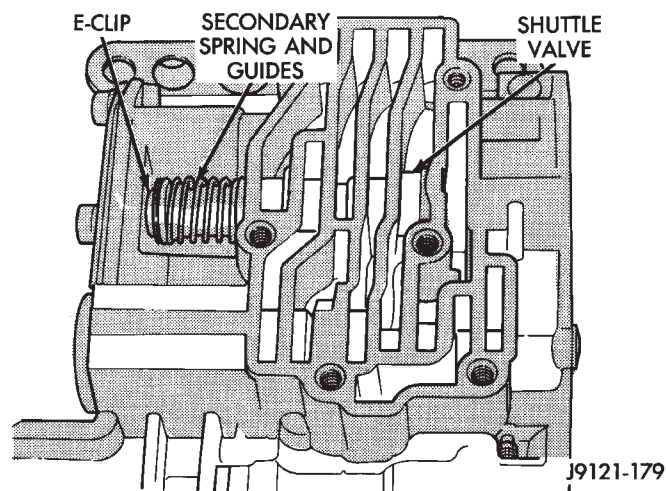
Shuttle Valve E-Clip And Secondary Spring Location
